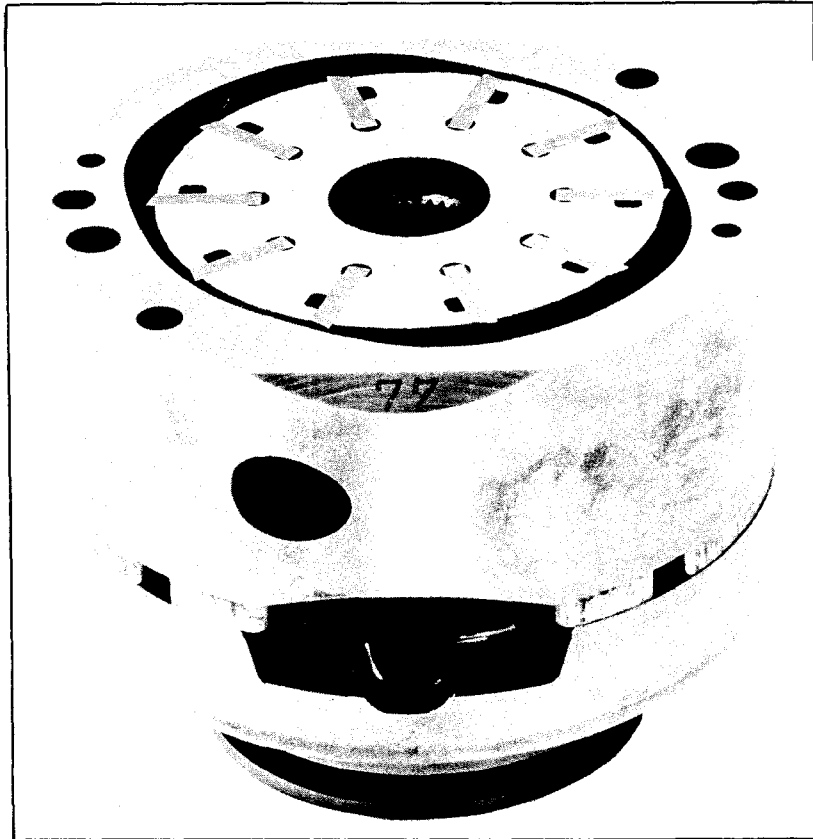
Outlet support plate and flex side plate assembled to cartridge.
